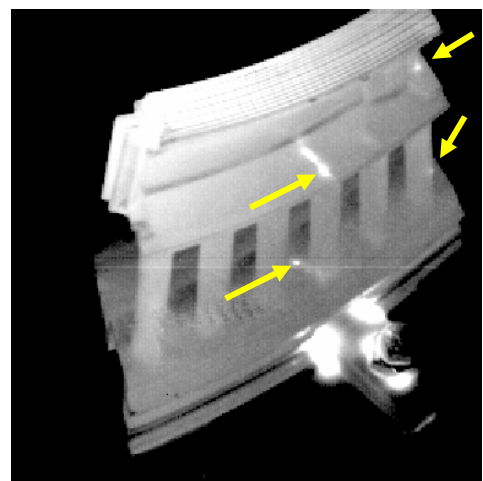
Inspection of Compressor Disk using Sonic Thermography
